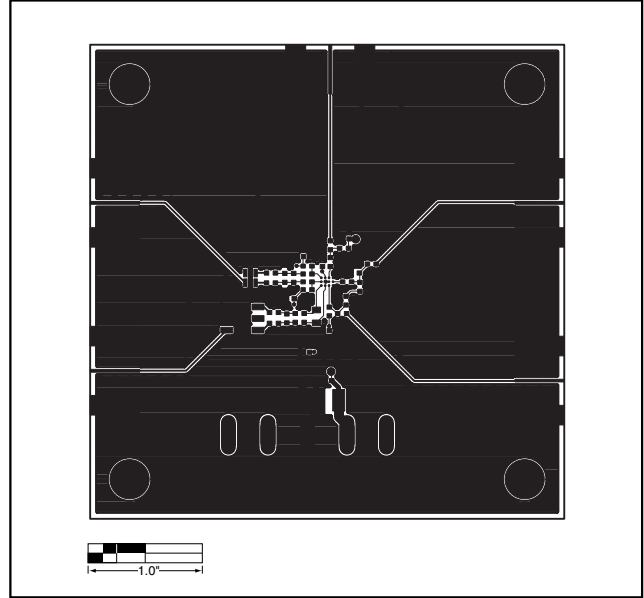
MAX2383 EV Kit PC Board Layout—Component Side
